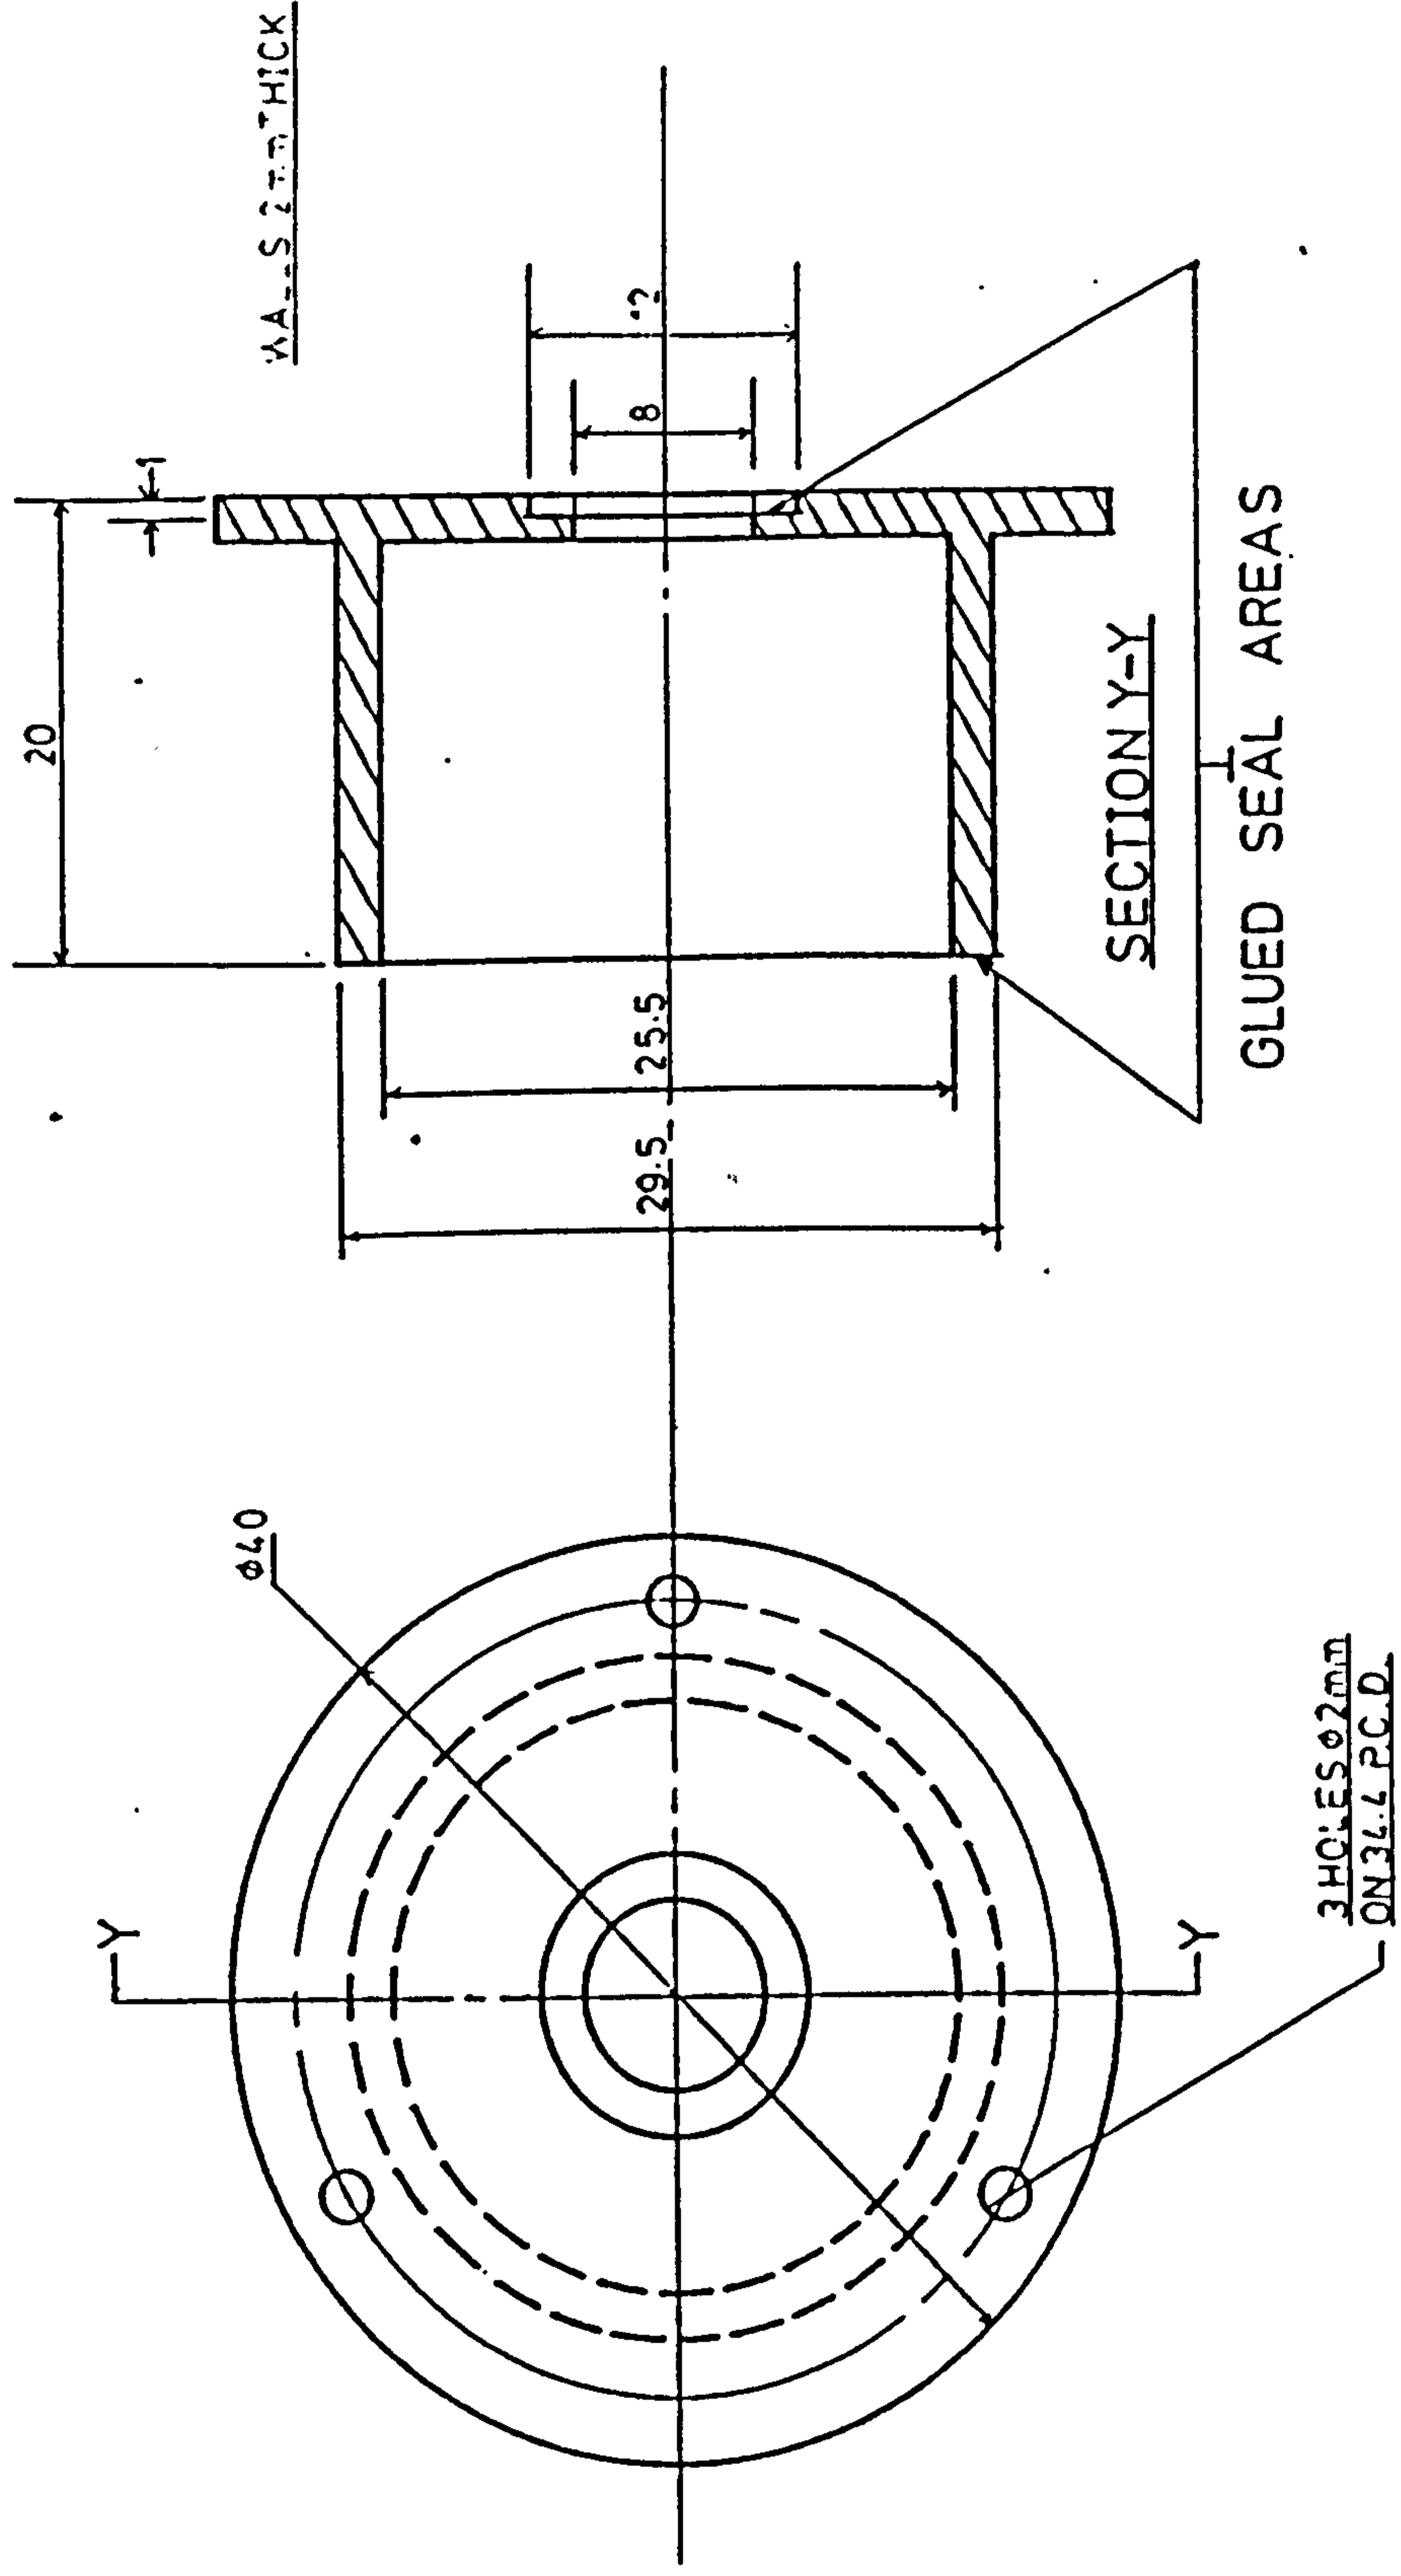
HOOD MOULDING FOR ASPIRATED MODE SENSOR MOUNTING.
